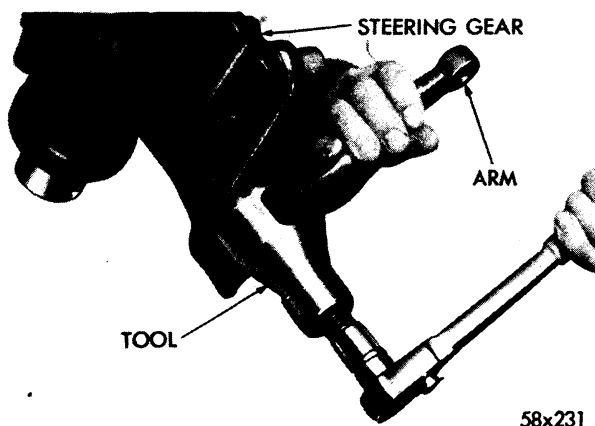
Removing Steering Gear Arm with Puller C-3646
